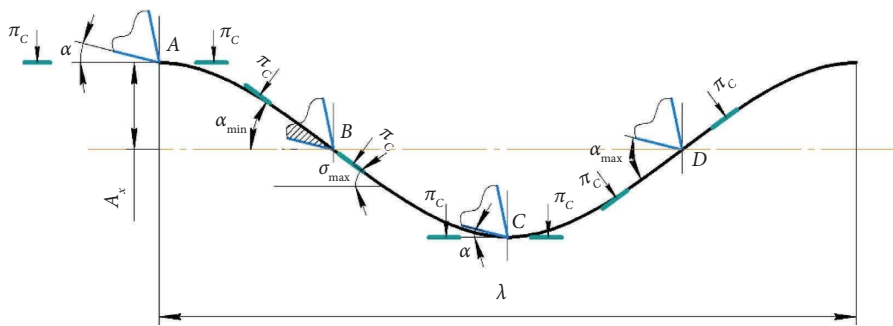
Scheme of contact of the flank surface of the cutter with the cutting surface.
